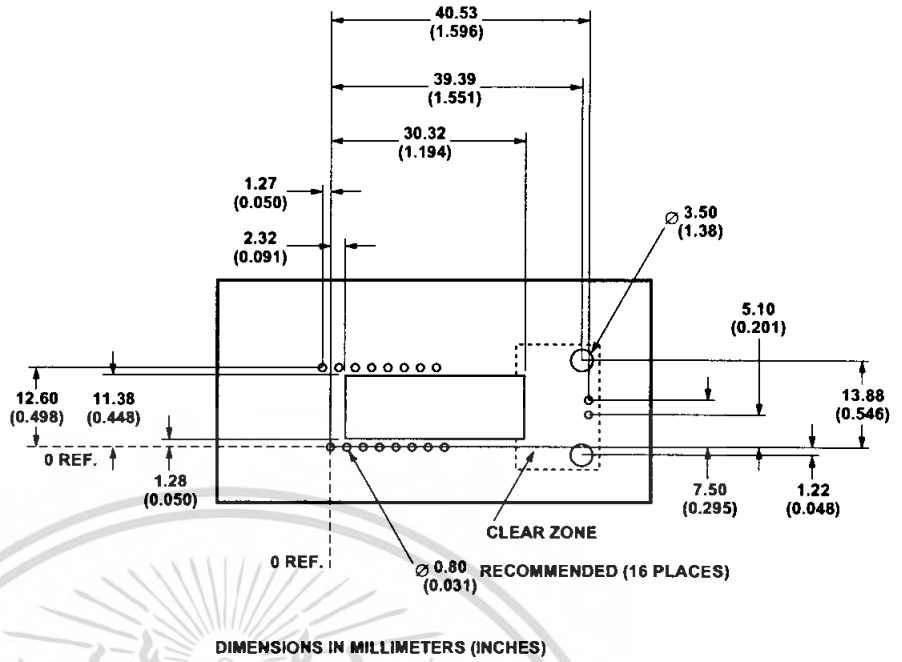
Recommended PCB mechanical cutouts and spacing (top view).
